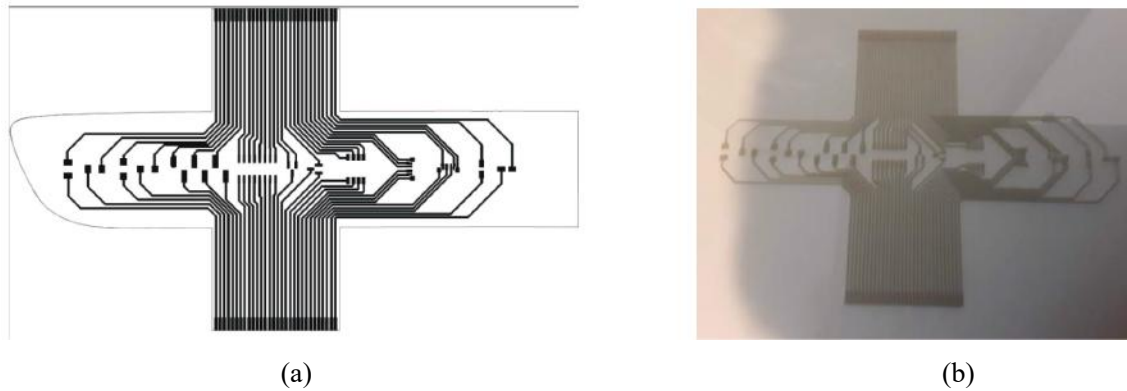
(a) Revised printed circuit design and (b) physical prototype for surface mounting of electrical componentry. Source: Ford Motor Company.
